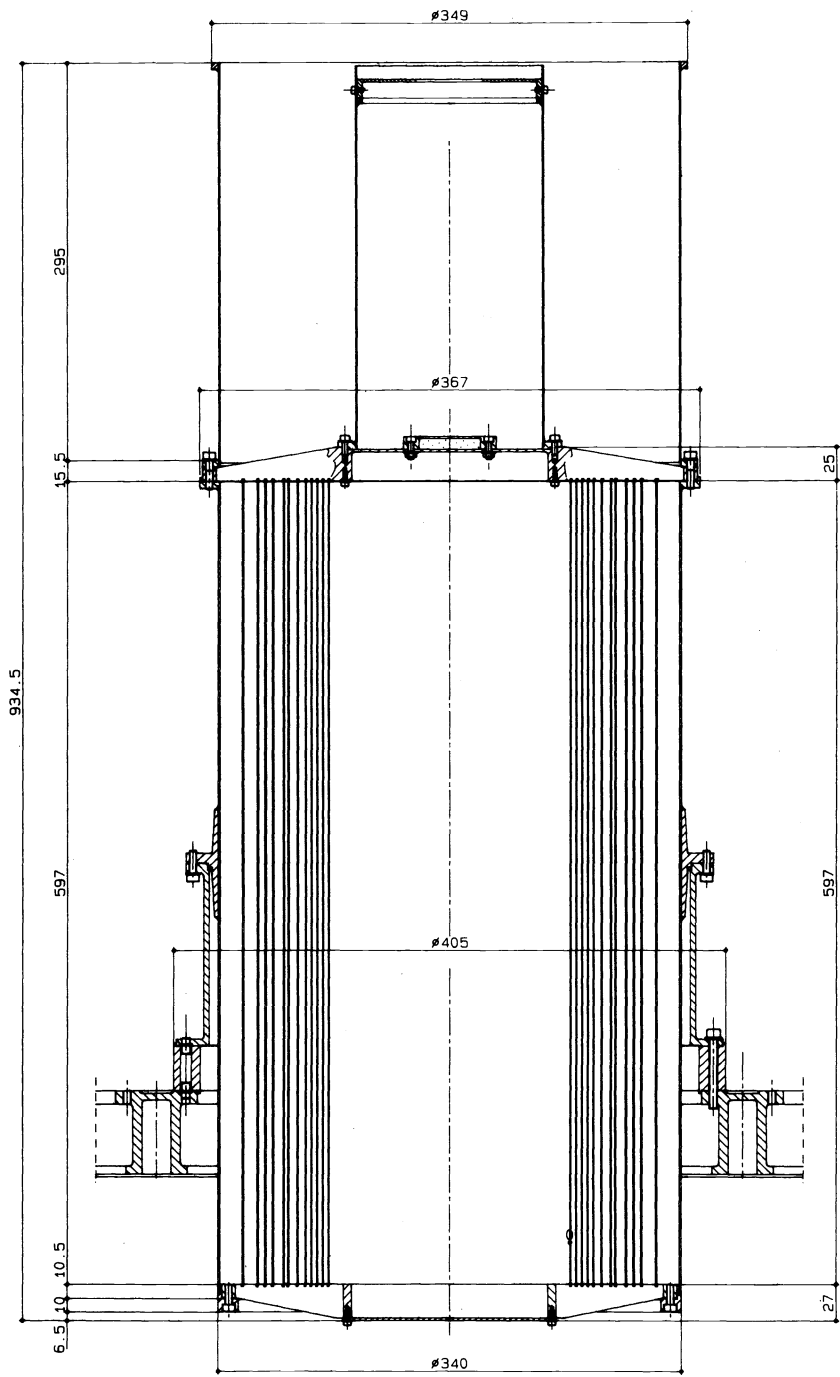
Assembly drawing of JET-X X-Ray optics
